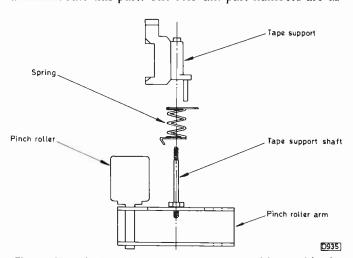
The pinch wheel tape support assembly used in the Amstrad Model VCR4600.
